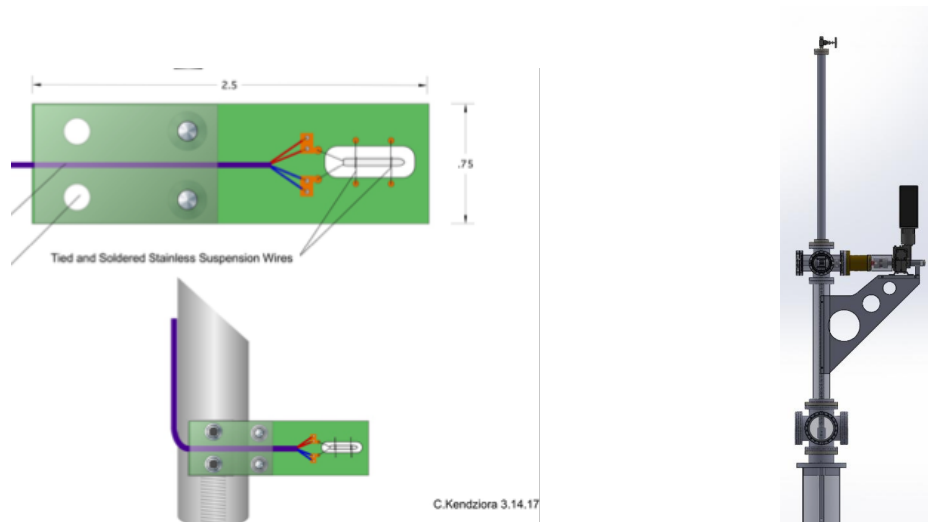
Left: Sensor mounted on a PCB board and PCB board mounted on the rod. Right: The driving mechanism of the dynamic T-gradient monitor. It consists of a stepper motor driving the pinion and gear linear motion mechanism.
